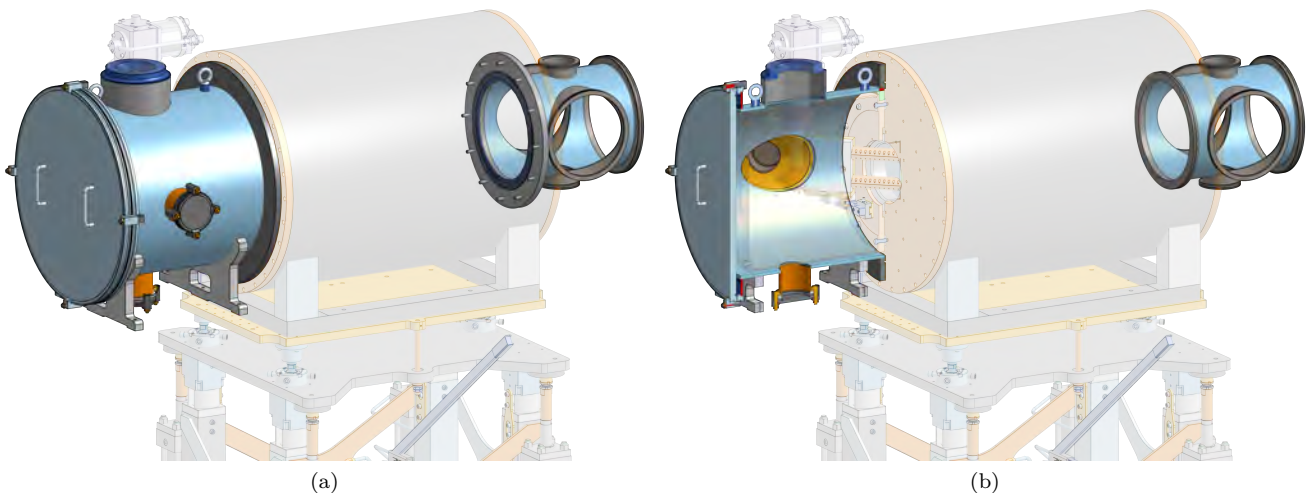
(a) CAD model of the vacuum chamber and vacuum cross. (b) Cross section of the vacuum components.
